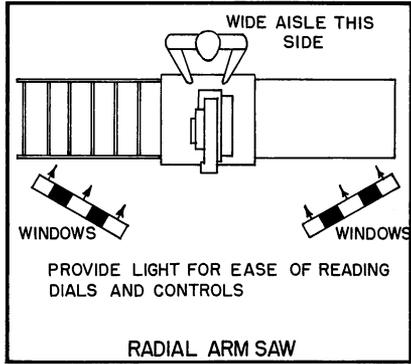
(Courtesy Rockwell Manufacturing Co.)
